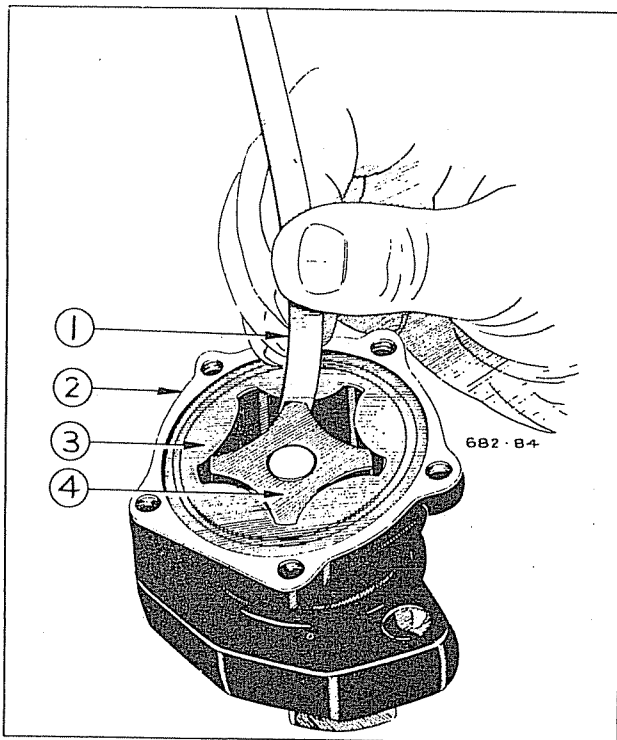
Measuring Clearance Between Inner and Outer Rotors.
